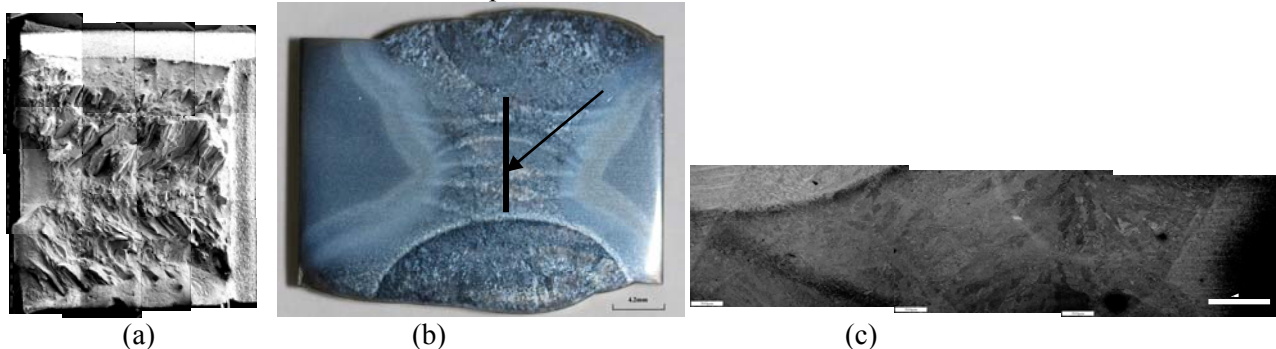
The fracture surface (a) and the macrostructure (b and c) of the weld metal T100
